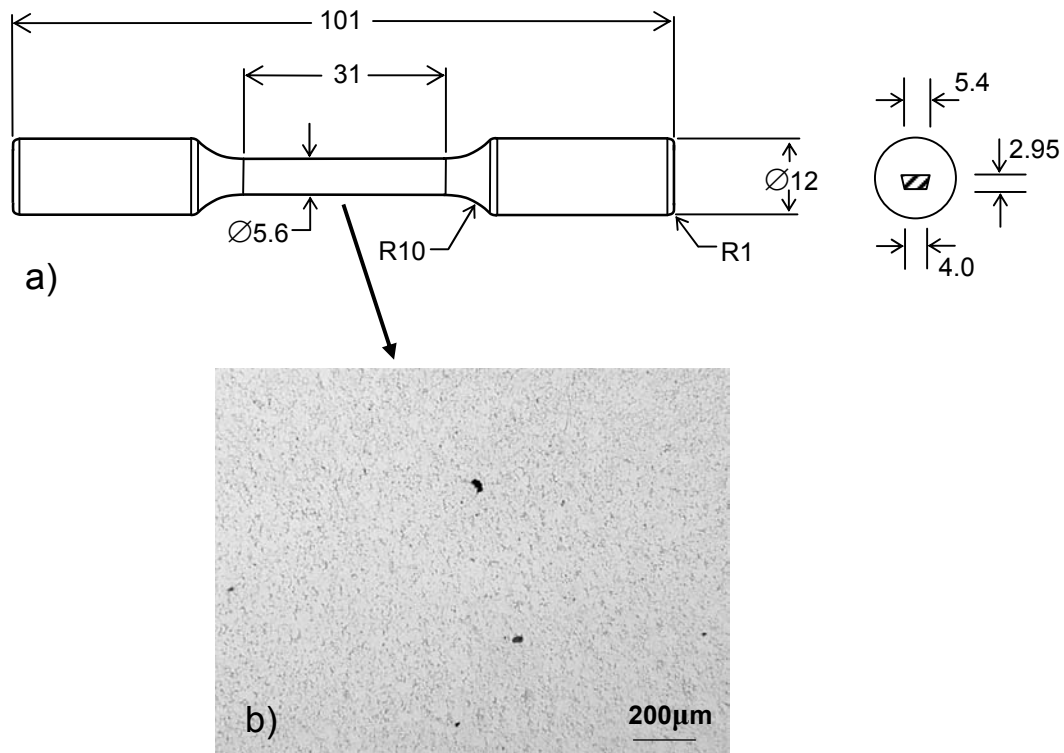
(a) Specimen geometry for both tensile strength and creep measurements (all dimensions in mm) and (b) low magnification image of the gauge length showing only a few small pores and no cracking.
